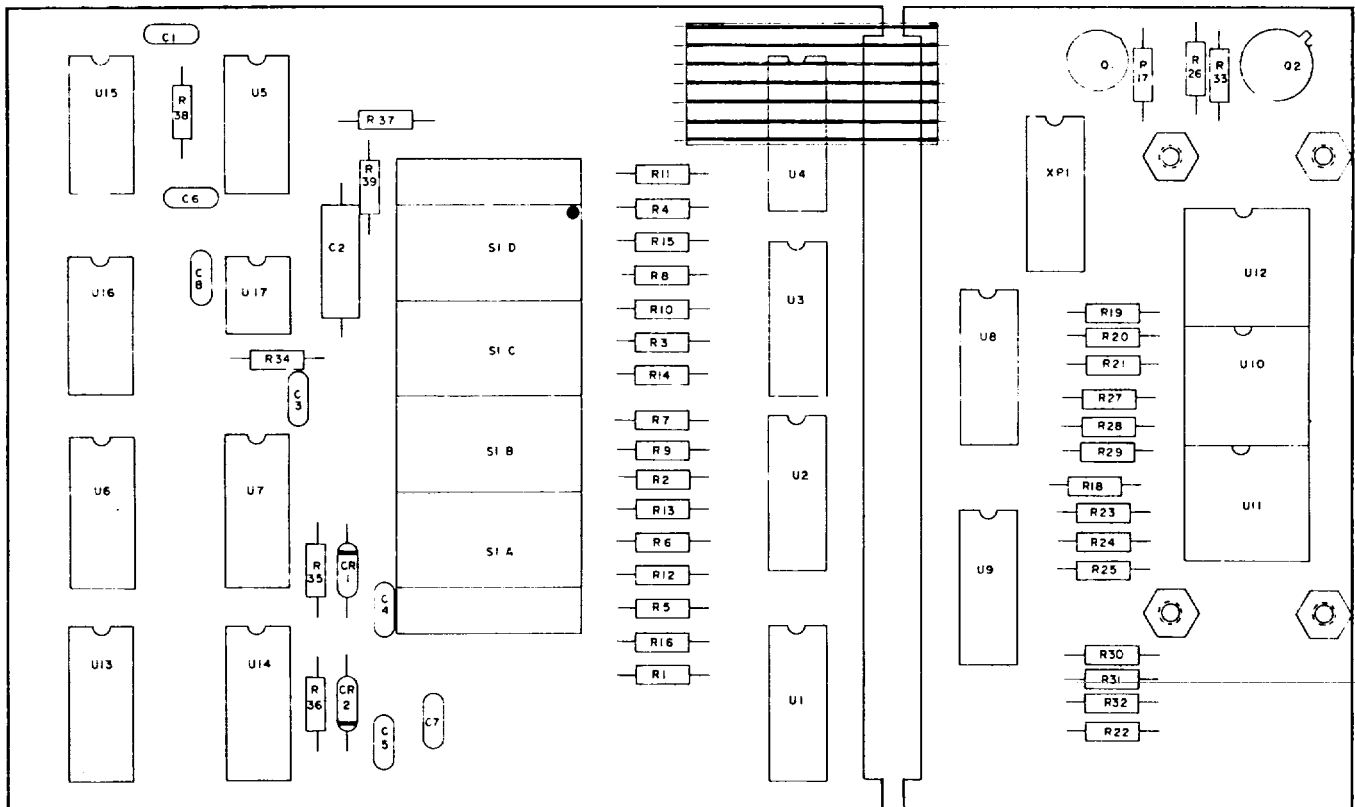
Reference Delay/Readout Circuit Card Assembly, 1A3A1 Parts Location Diagram
